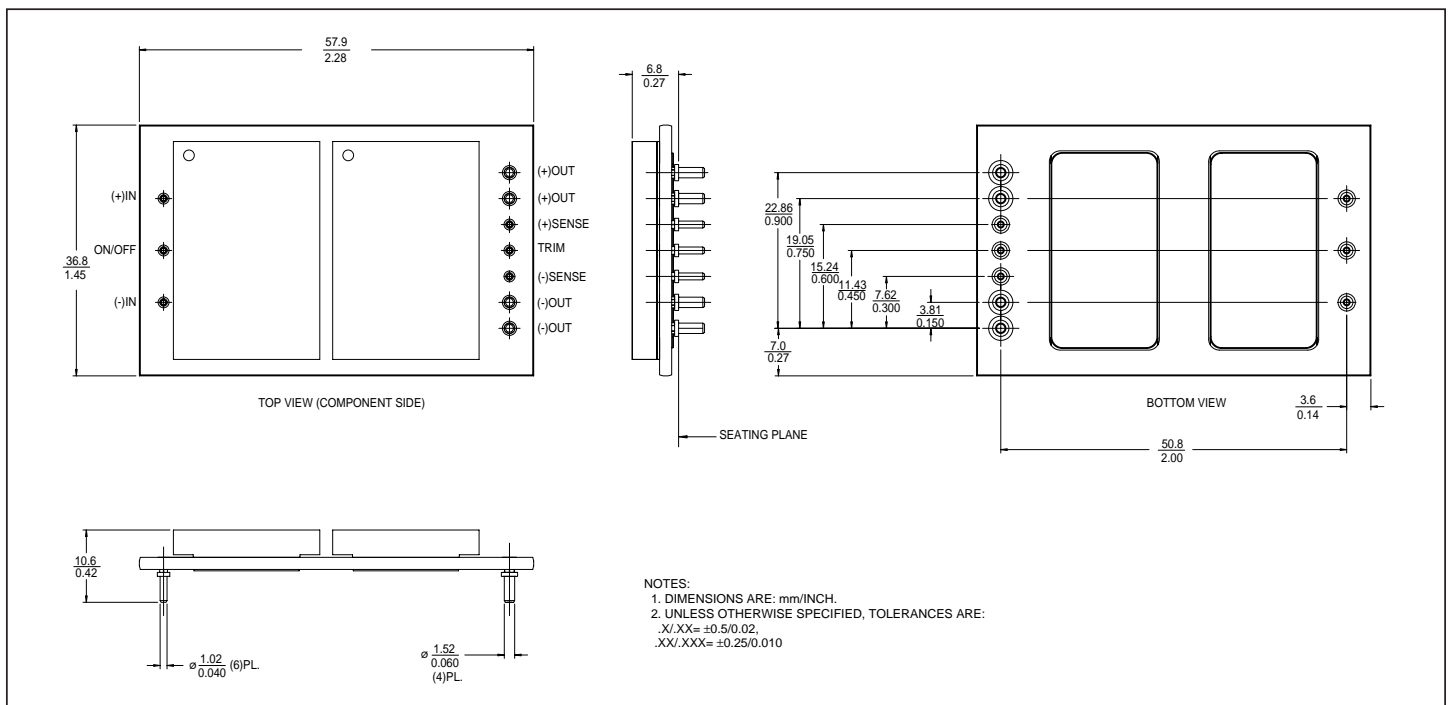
Mechanical outline and PCB footprint information; dual output pin version (package style 2)
